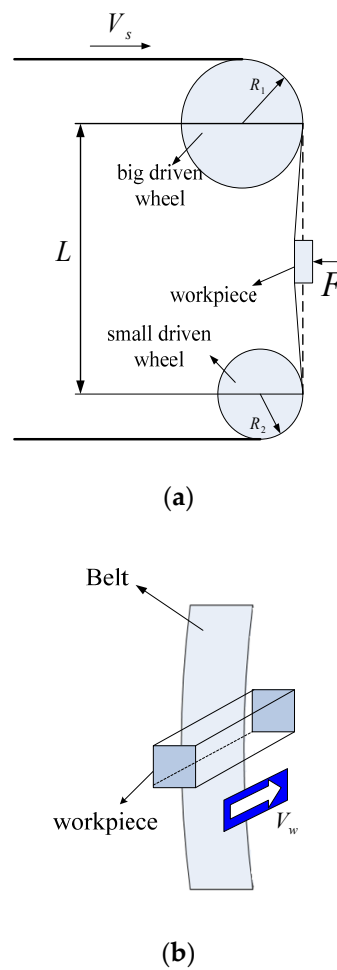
(a) schematic depiction of the abrasive belt grinding; (b) local schematic of workpiece and belt polishing.
